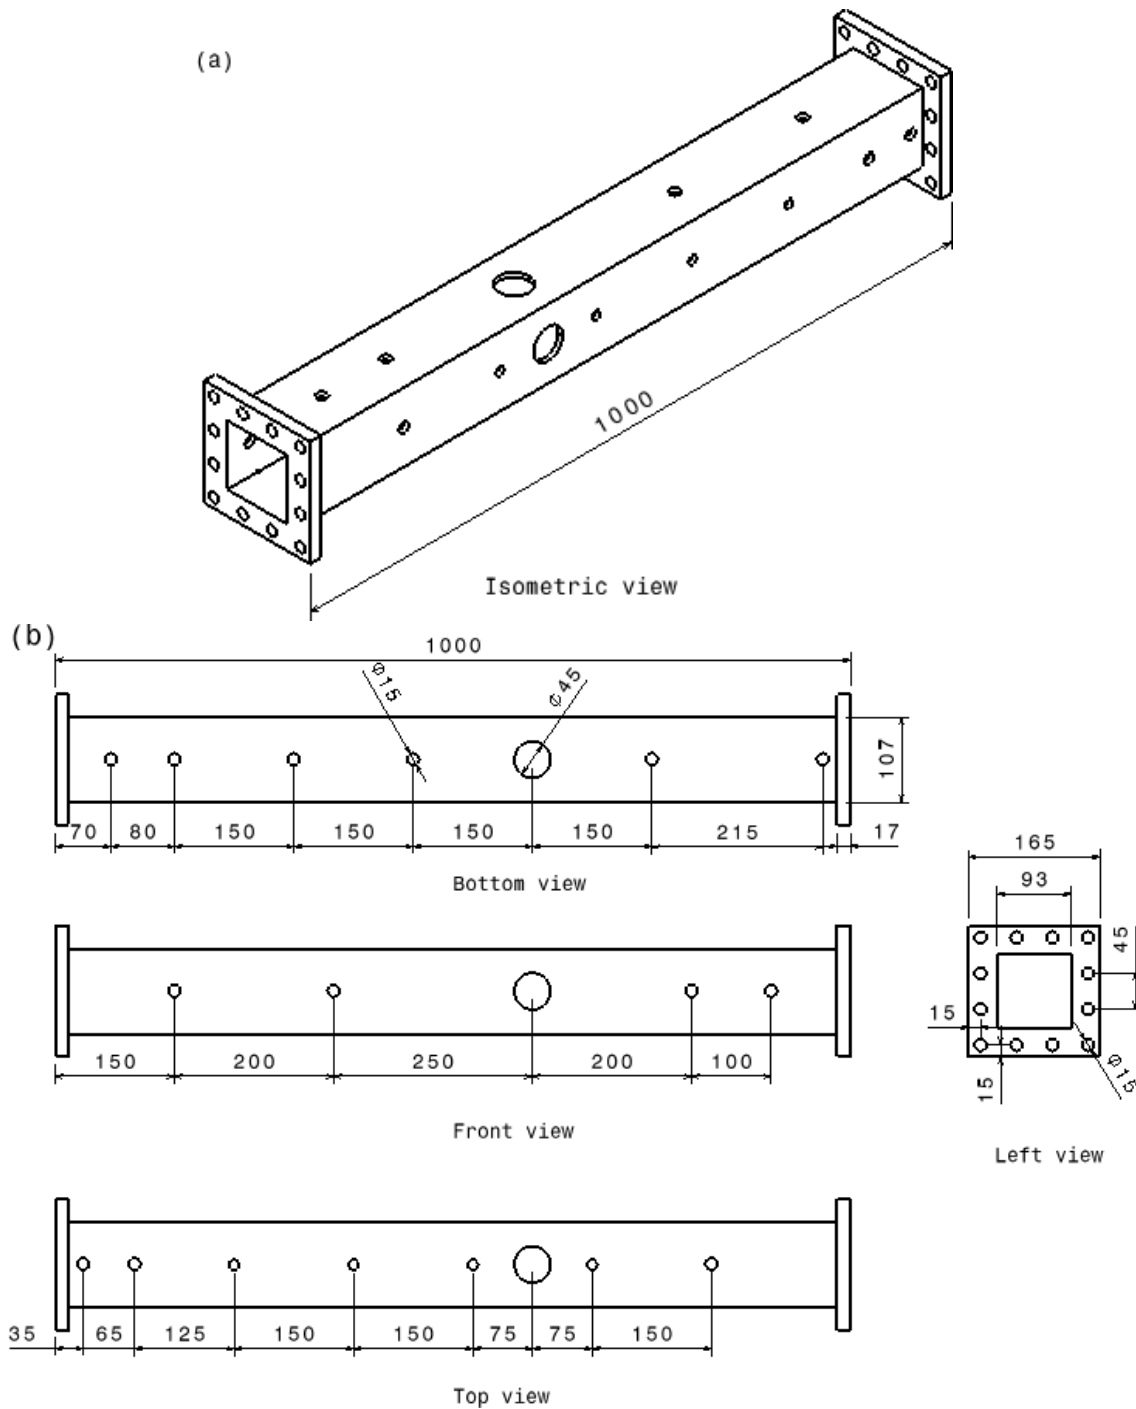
Detailed drawing for the Rijke tube along with provisions for instrumentation; *a*) isometric, *b*) Orthographic view. Microphones and thermocouples are mounted in the small holes, while acoustic drivers are mounted in the large holes. All dimensions are in *mm*.
